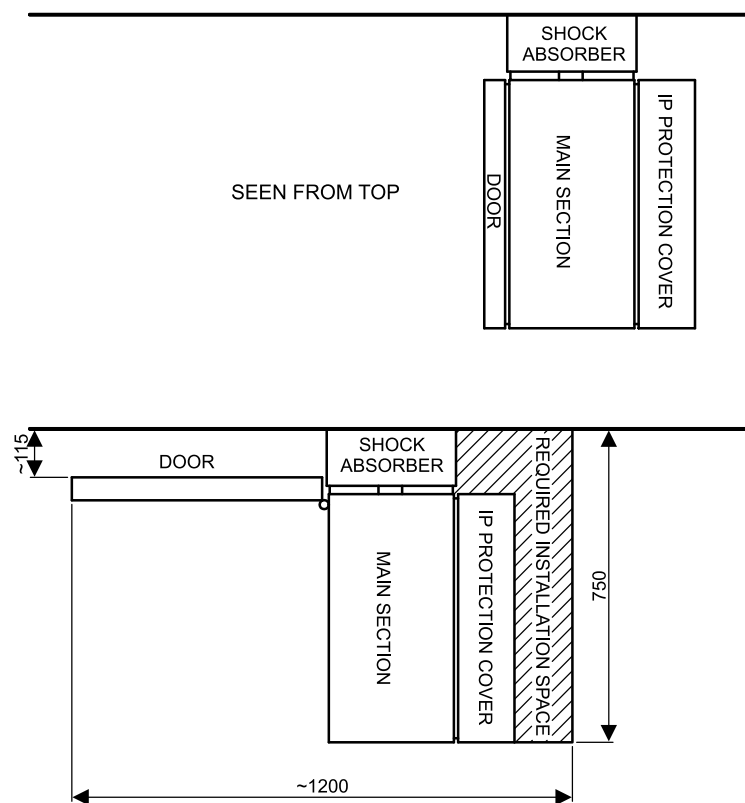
Transceiver Unit 0.5° x 1° system – Outline dimensions sheet 2
